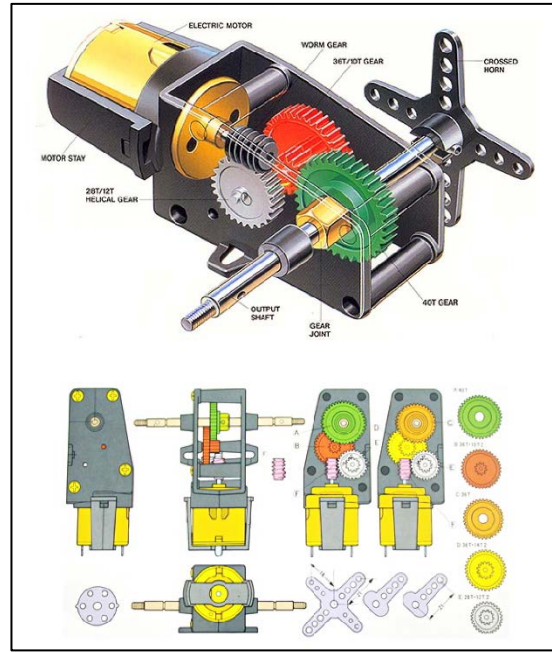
Schematic diagram of a DC gear motor structure [41]
